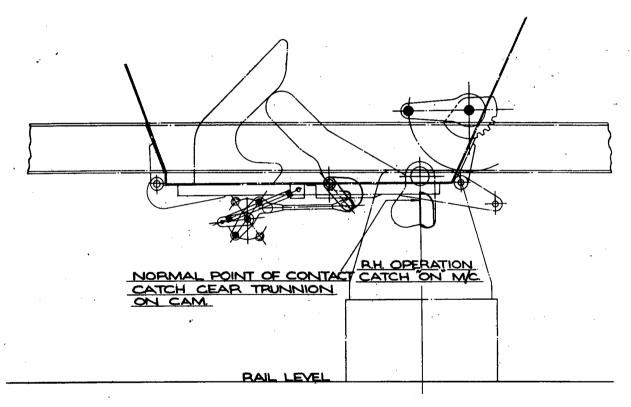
H. WAGON APPROACHING SAFETY CATCH ON LINESIDE MACHINE.
